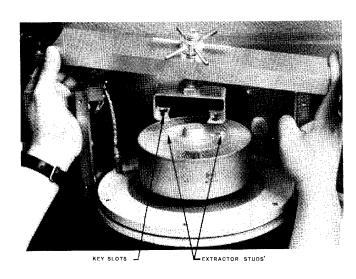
Tube Puller J15449 for Use with BURLE Tube Type 8806
